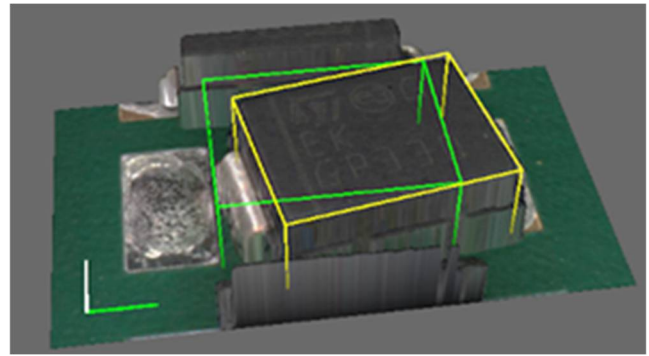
Example of pre-reflow 3D inspection detecting part skew, which is fed back to mounter
